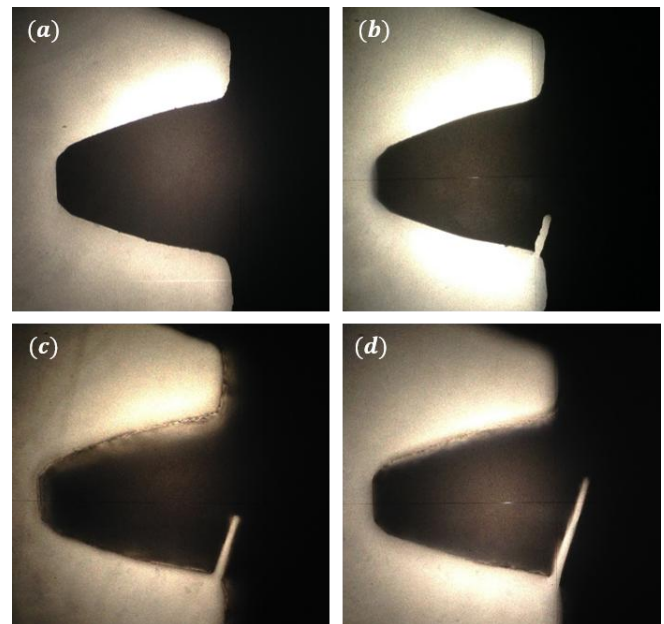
Seeded tooth root crack (a) healthy; (b) 1.4 mm; (c) 2.1 mm; (d) 3.5 mm.
